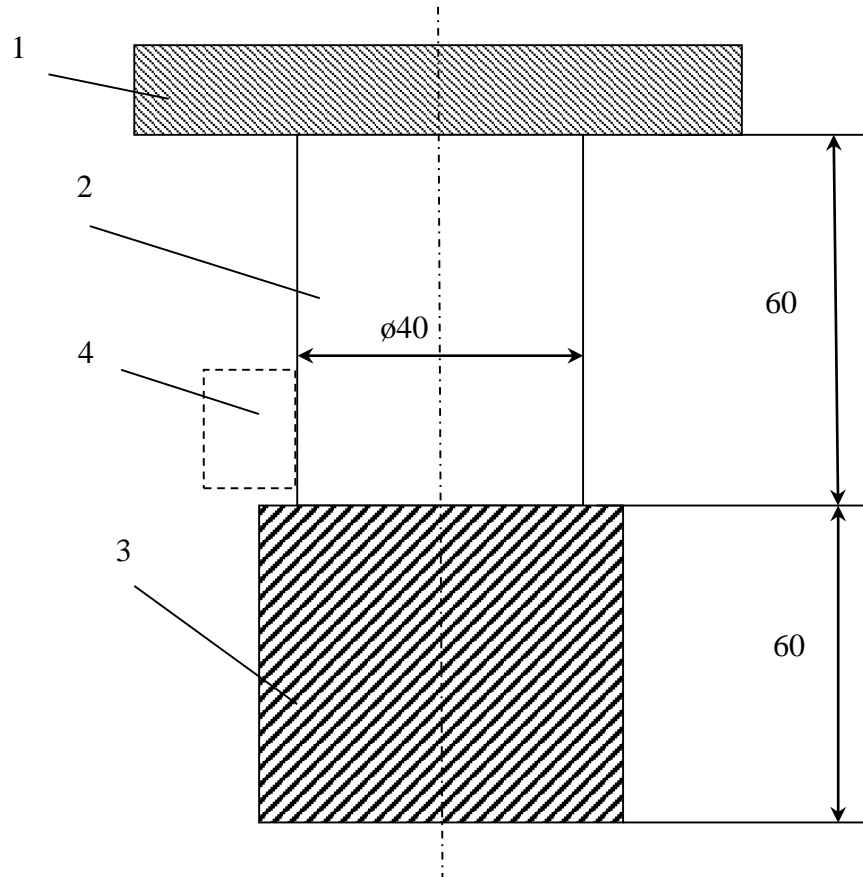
Energy generator mounting scheme on milling tool: 1 – tool holder; 2 – mill; 3 – workpiece; 4 – wireless energy transducer.
